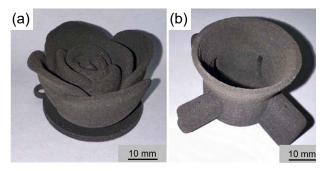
Complex ceramic samples: (a) rose-shaped; (b) impeller-type shell [61]
